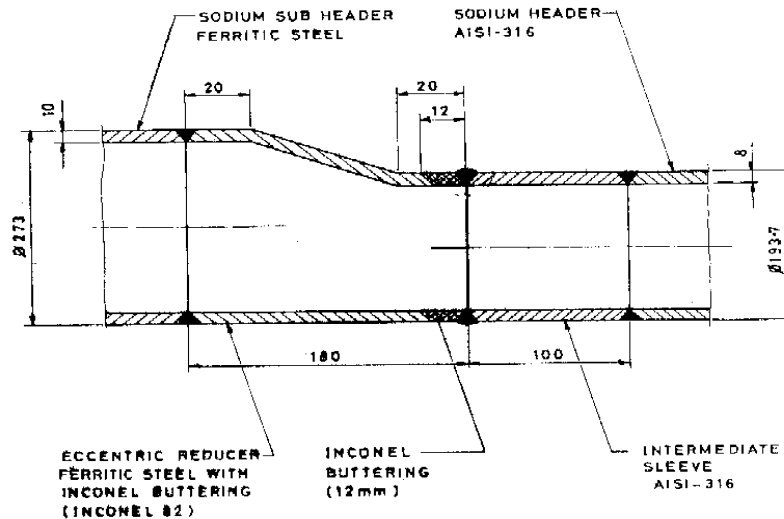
DISSIMILAR WELD JOINT DETAILS.
